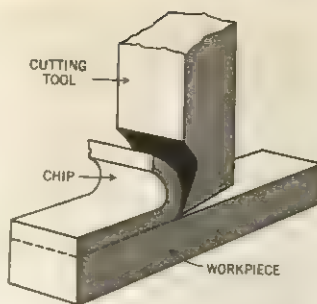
BASIC MACHINE-TOOL OPERATIONS: PLANING
